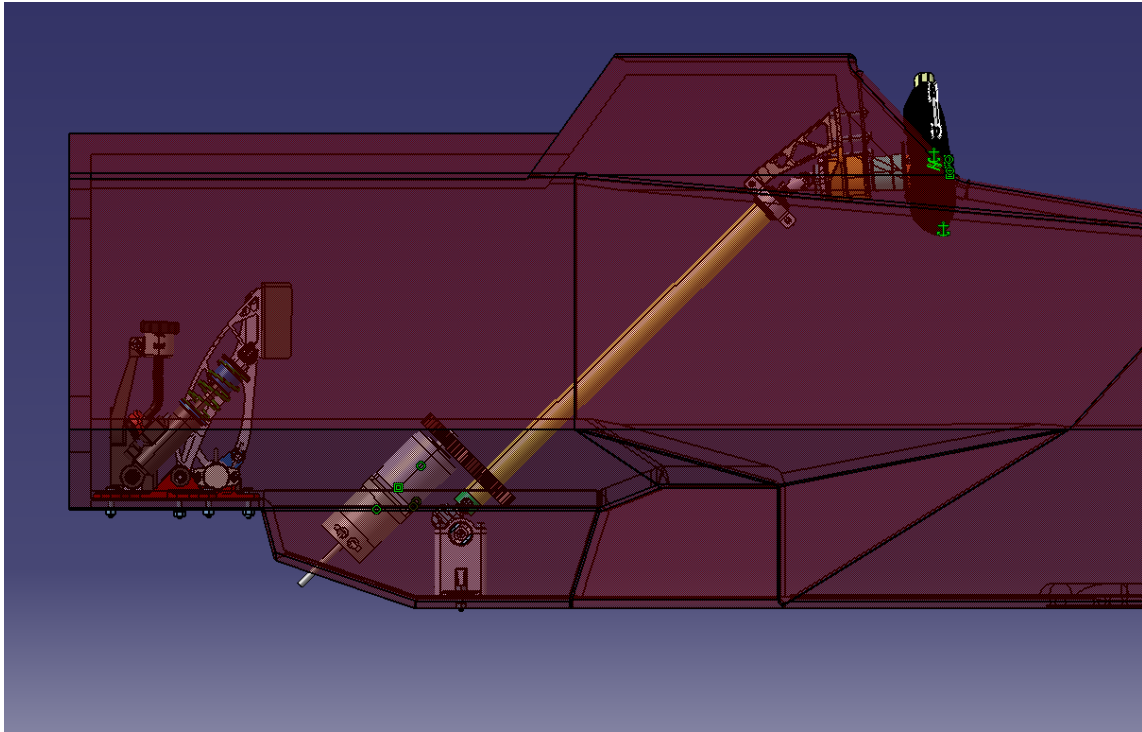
Solution 3 - BLDC motor + planetary gearbox assembly and gear drive in SC19
